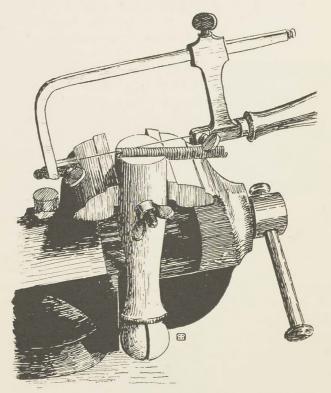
Cutting a coil of wire into rings with a piercing saw.
